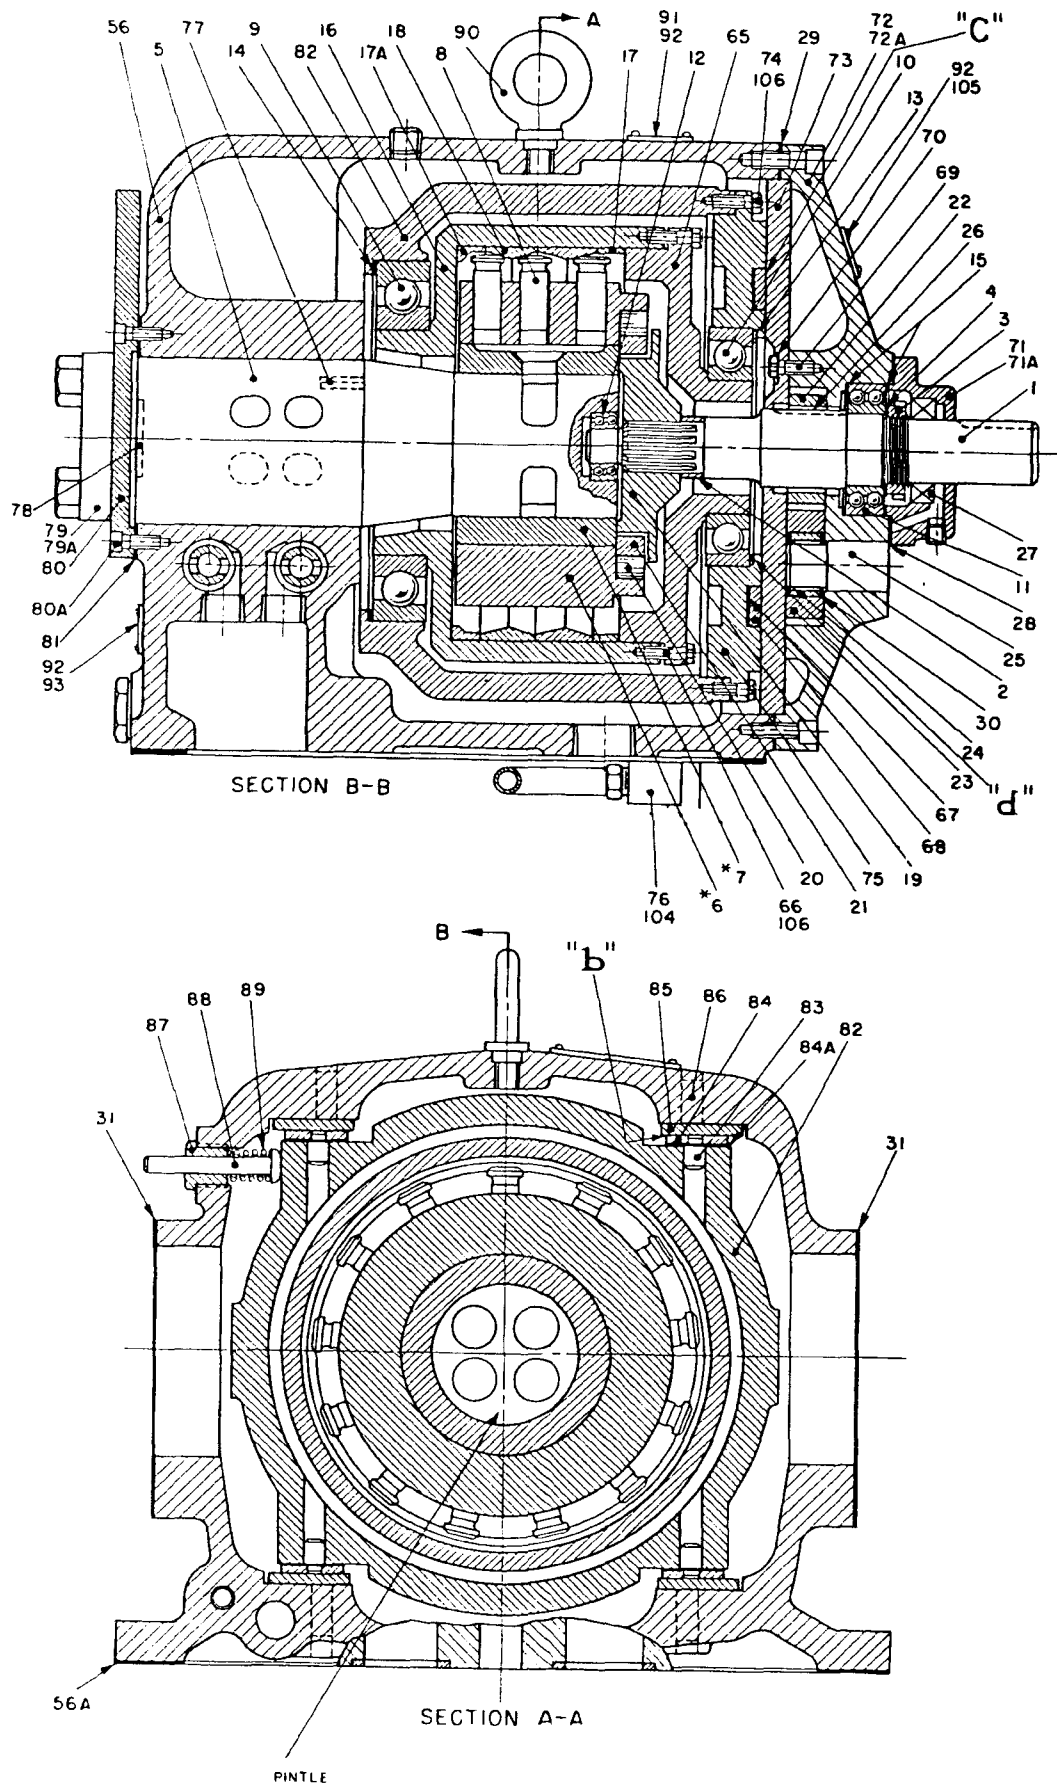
Parts Drawing, Oilgear Type "D" Units size 4 thru 60. DS-947916E (503293E)
